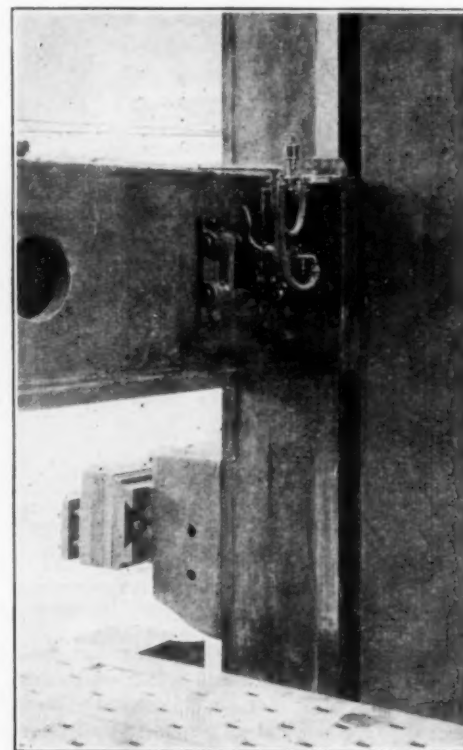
PNEUMATIC DEVICE FOR CLAMPING PLANNER CROSSRAIL
